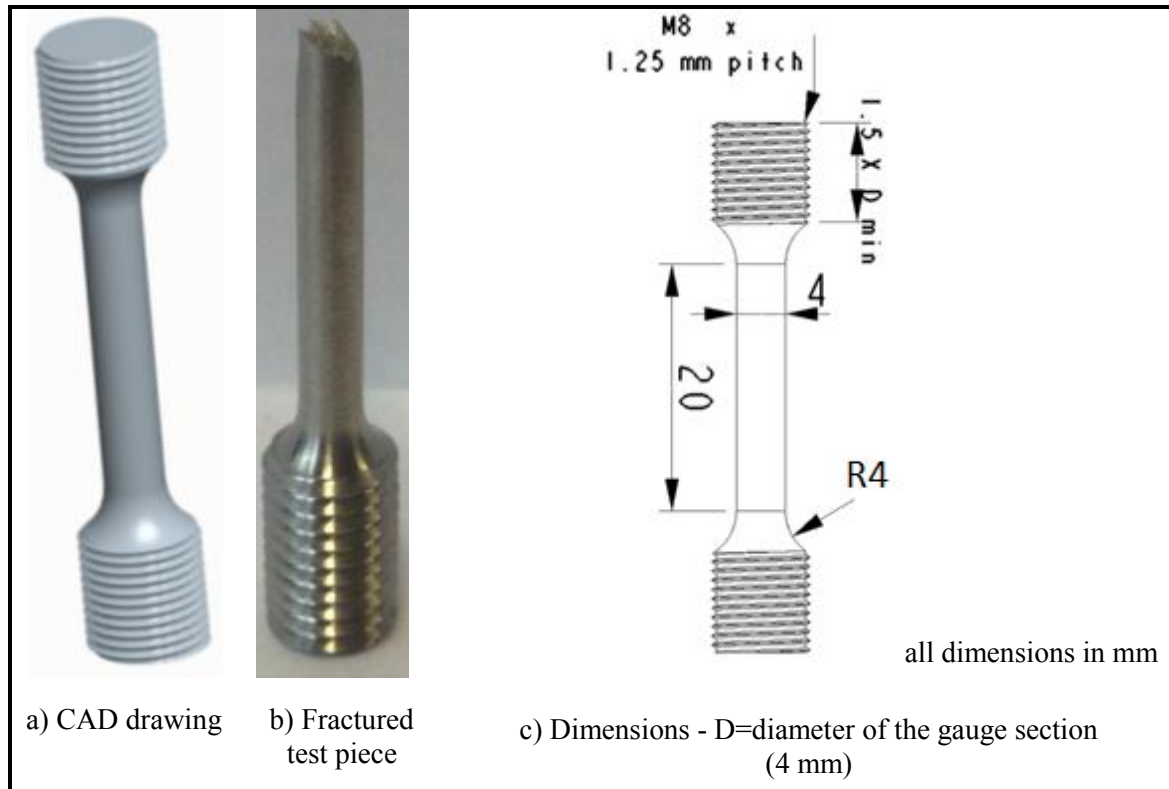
Schematic diagram of the tensile test piece dimensions
